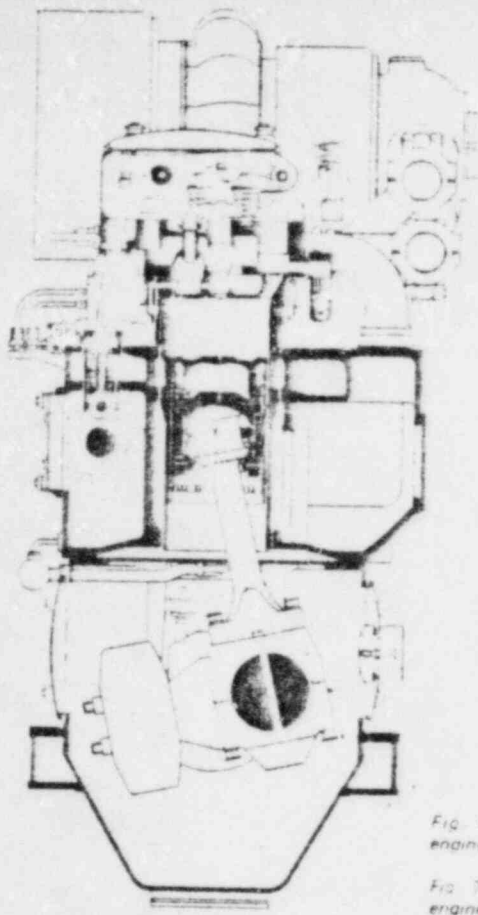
(Left) Cross-section of ZL 40/45 engine.
